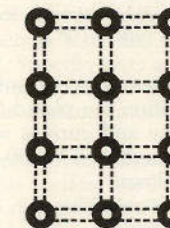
Test coupon used for plated-through-hole structure testing (IPC).
